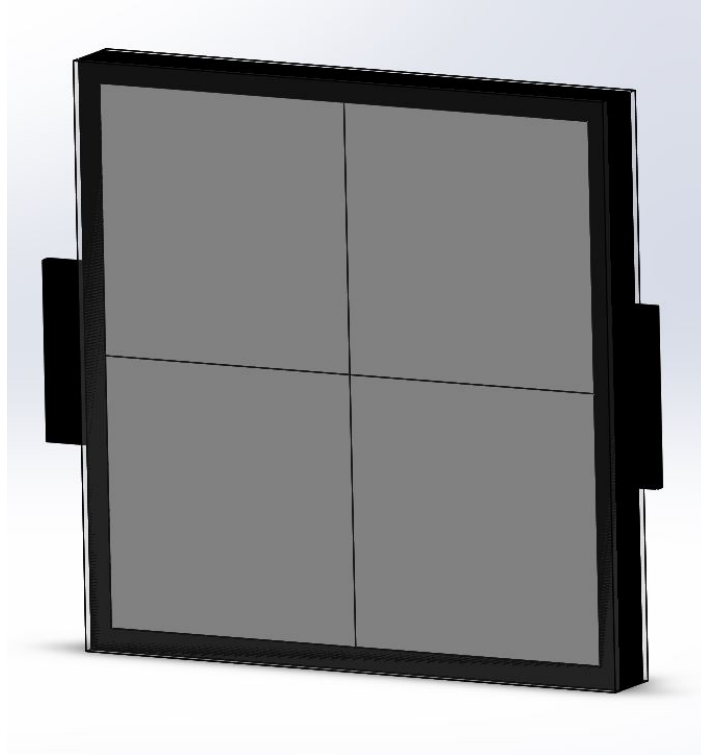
shows the Solidworks model of the window assembly with aerogel inserts.
